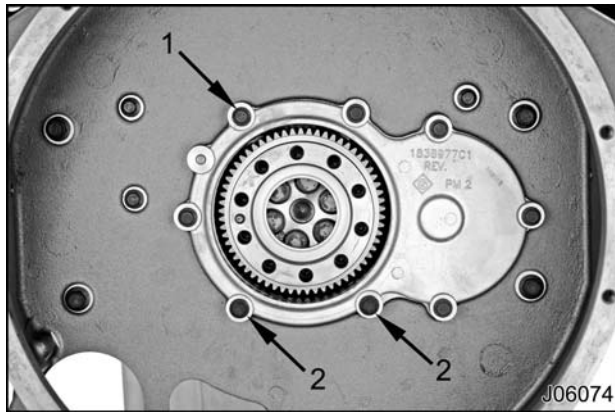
Rear oil seal carrier bolts (stripped chassis)
